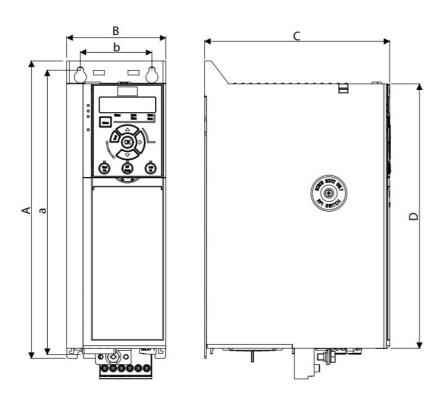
Mechanical Dimensions, Enclosure Sizes J1-J7
